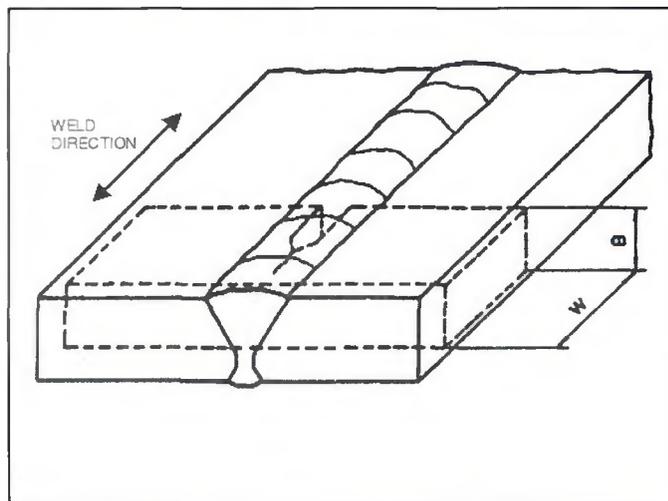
Schematic drawing of CTOD test specimen and dimensions: *W* and *B*.
